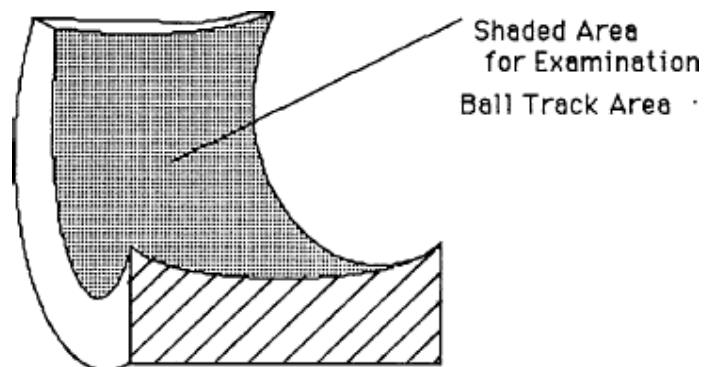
Outer ring of Test Bearing (double row self aligning ball bearing) examined for rust rating
